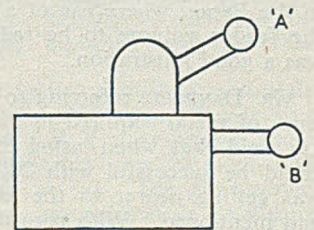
FIG. A.—Schematic Plan View of Metal entering "A" through the Head, or "B" directly into the Casting.
